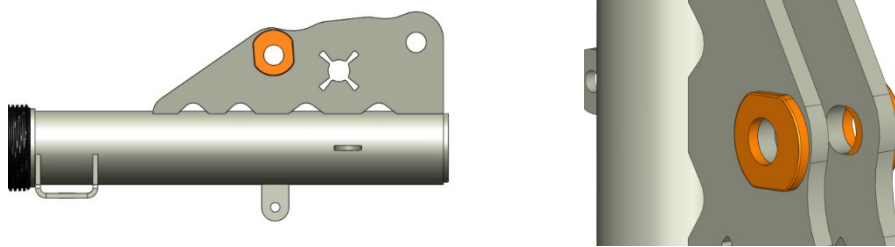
SMG Strut Housing with Camber Slug Installed.”
